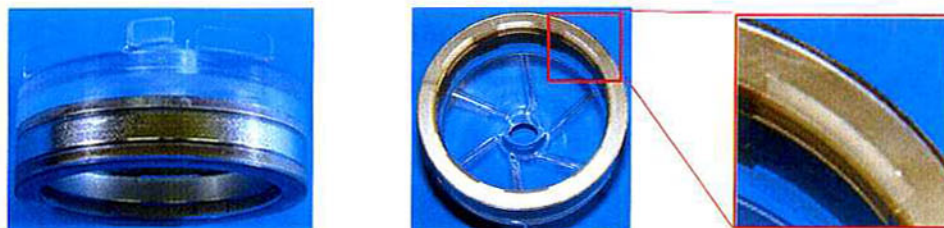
Photographs of the impeller fabricated by the modified process
